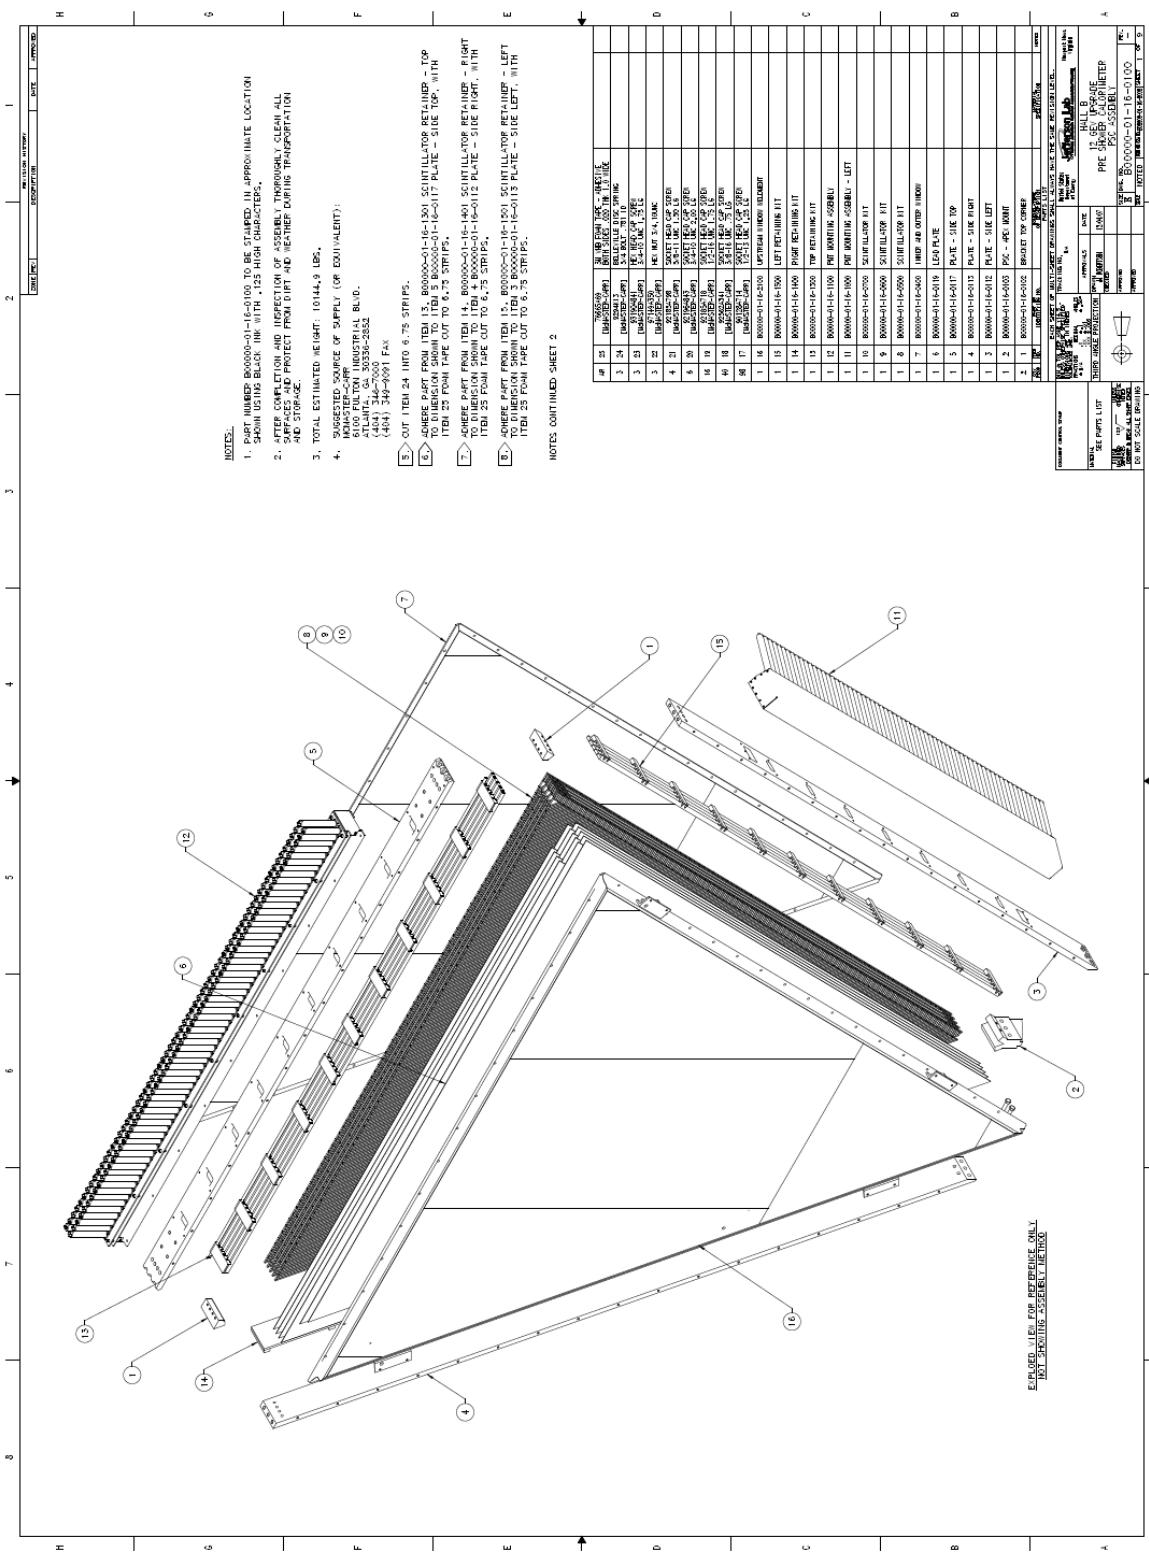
Assembly drawing of the CLAS12 PCAL.
